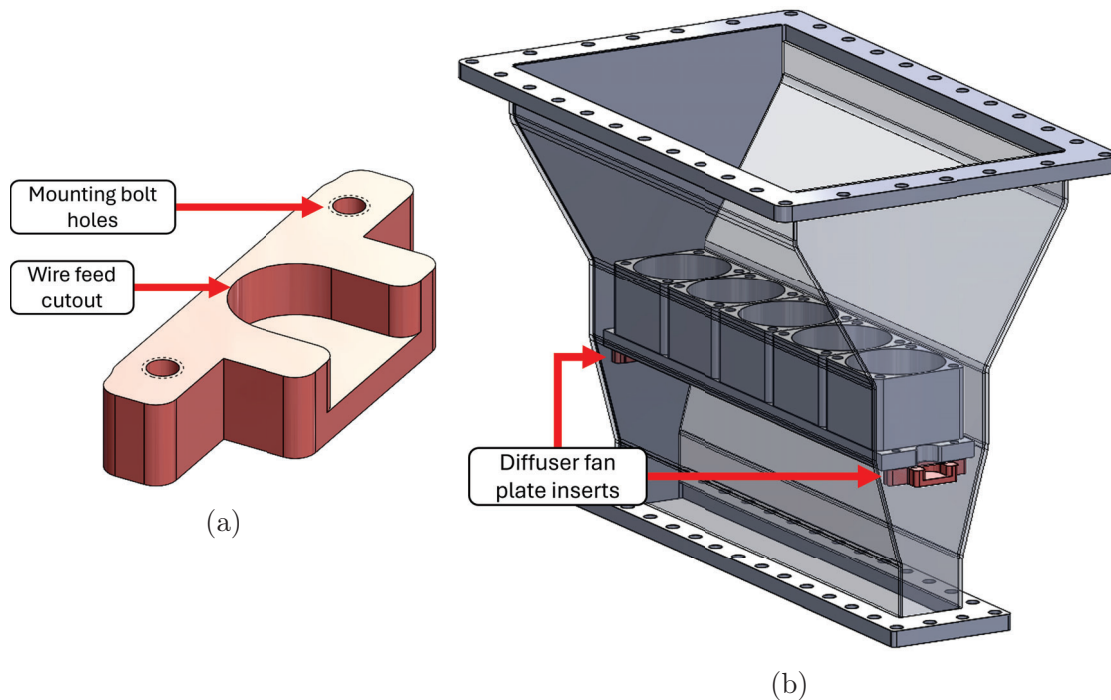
The diffuser fan plate is mounted inside the diffuser through an additional insert (a). This insert includes tapped bolt holes for mounting the fan plate and an open pocket for creating space to feed the fan wires through the diffuser wall. The diffuser fan plate is mounted on two of these inserts, one on each side of the diffuser.
